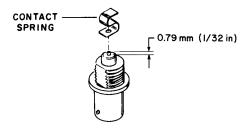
Cutting Center Conductor Lead to Accommodate Contact Spring
